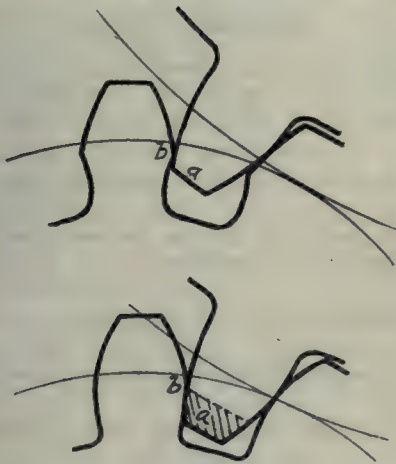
INTERFERENCE OF TEETH OF GEAR WITH FLANK OF PINION AND ITS CORRECTION.
